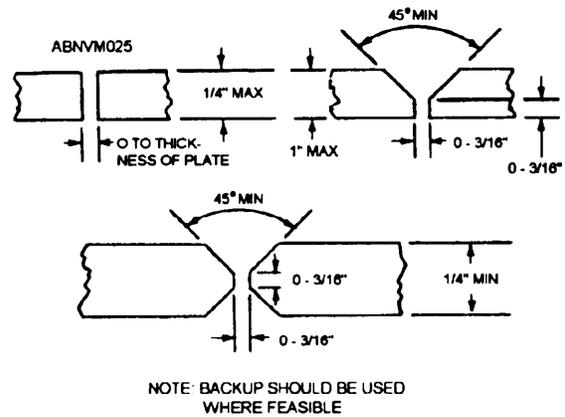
Single-vee and double-vee groove welds.
